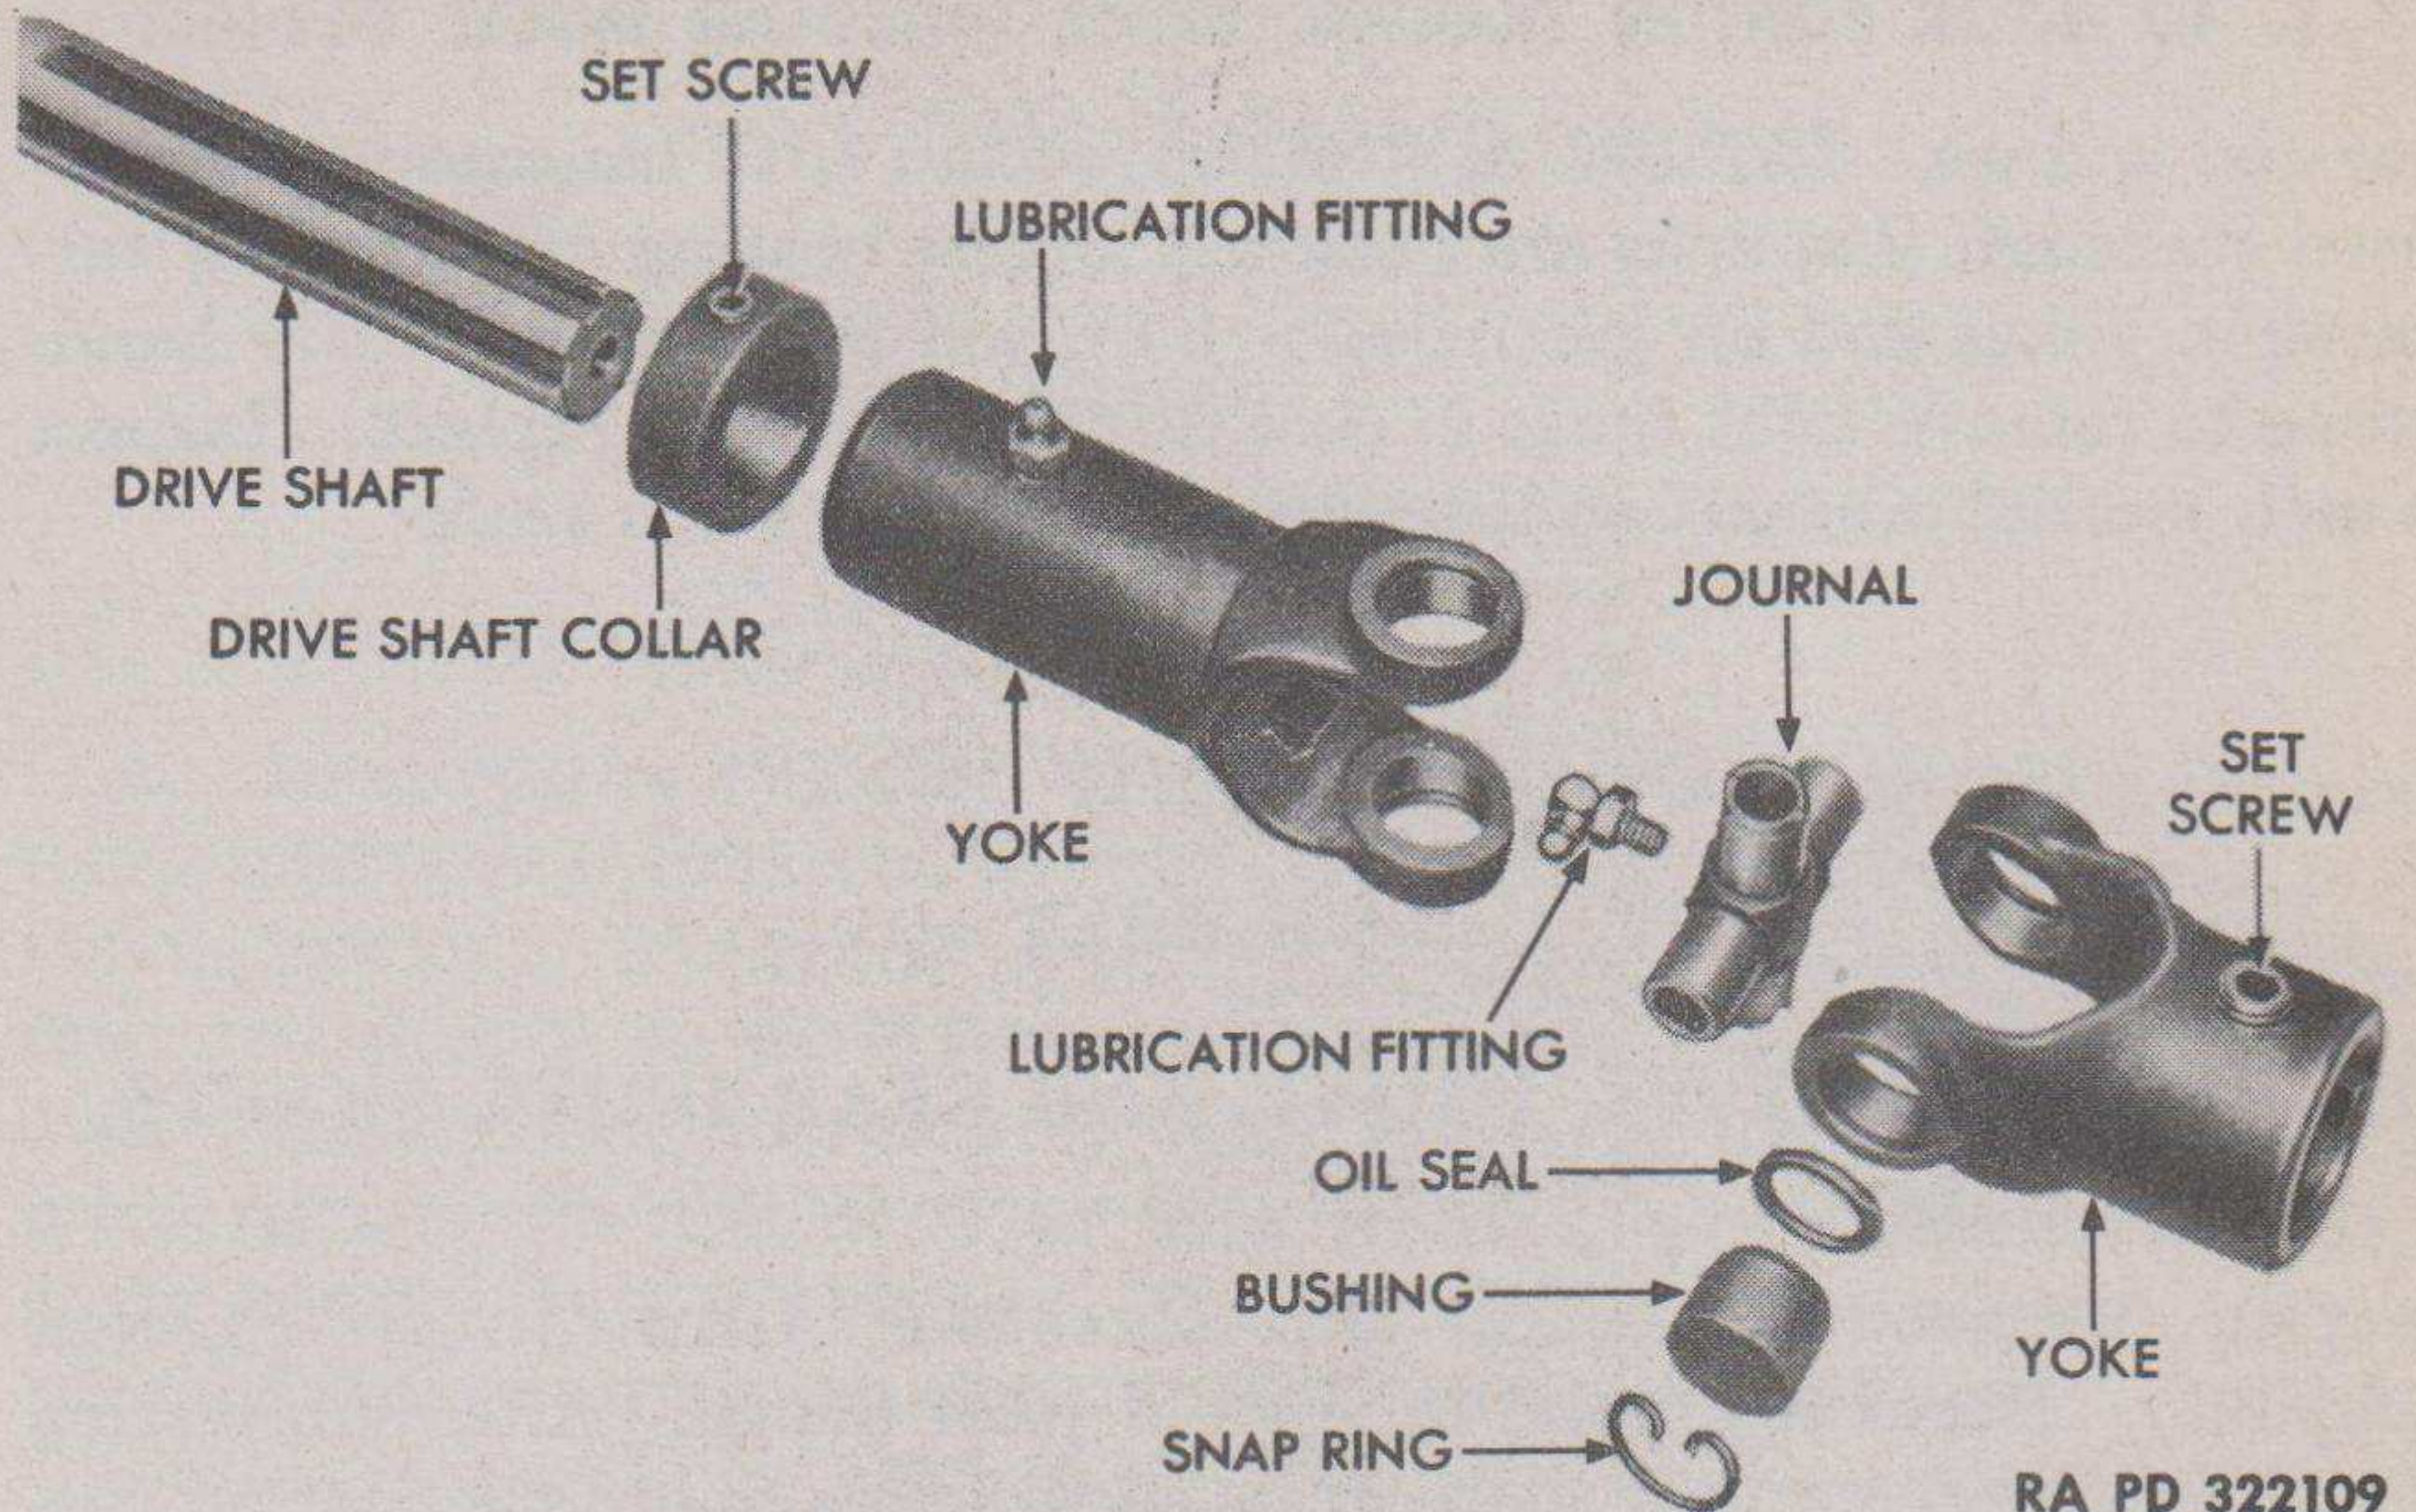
Intermediate Drive Shaft Universal Joint Disassembled
